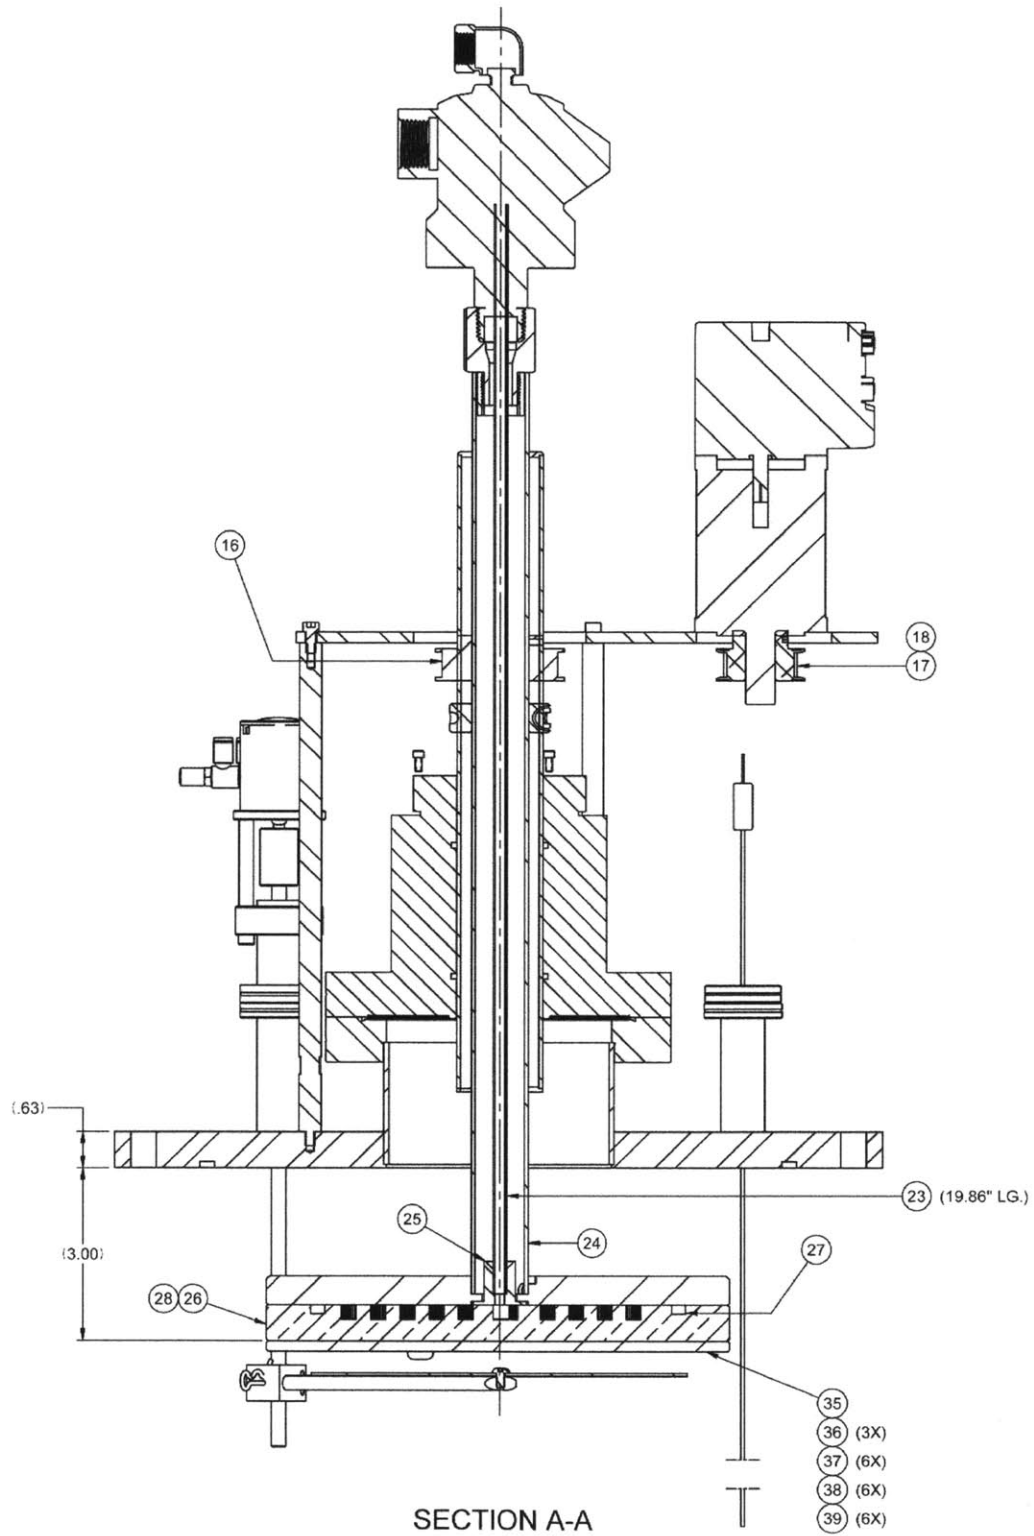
Engineer drawing of top flange of oCVD reactor chamber—cross section from side.
